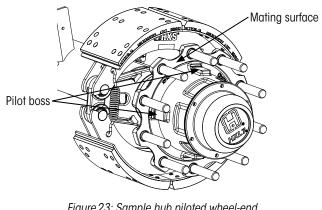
Sample hub piloted wheel-end (Drum brake hub shown)
